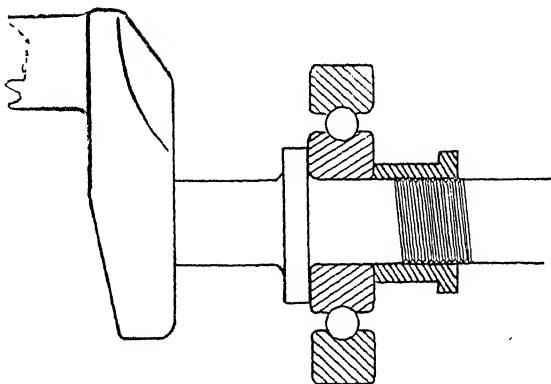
B.—DETAIL OF SINGLE ROW THRUST BEARING.
